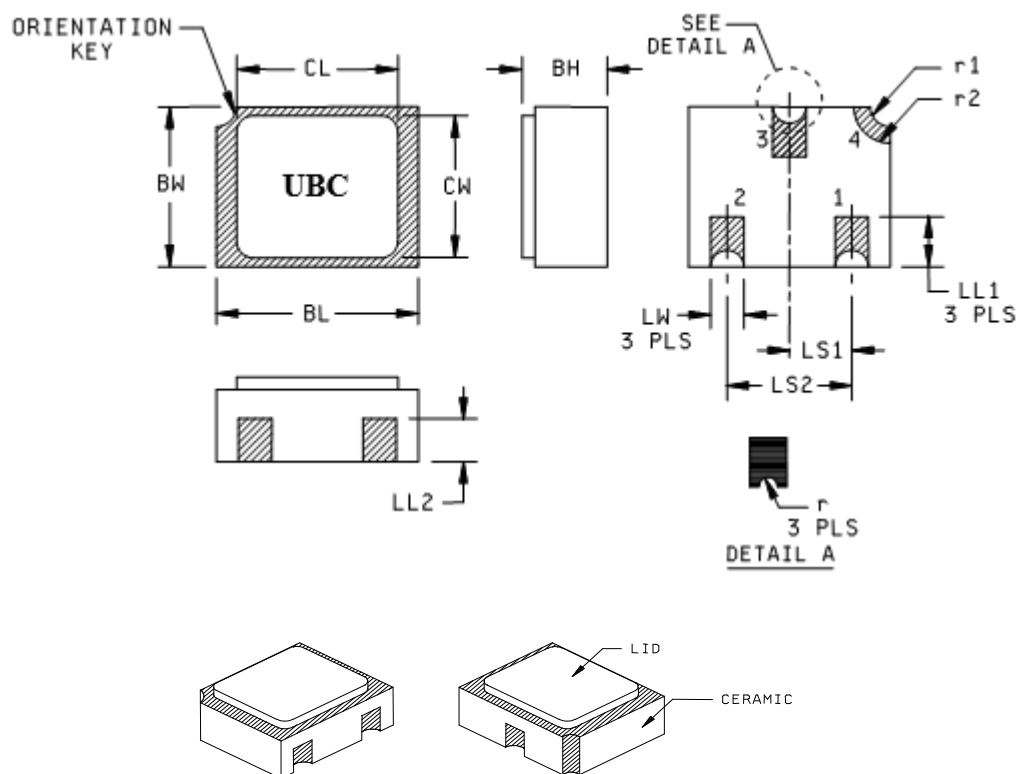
Physical Dimensions, Surface Mount (UB Version)¹⁻⁵
